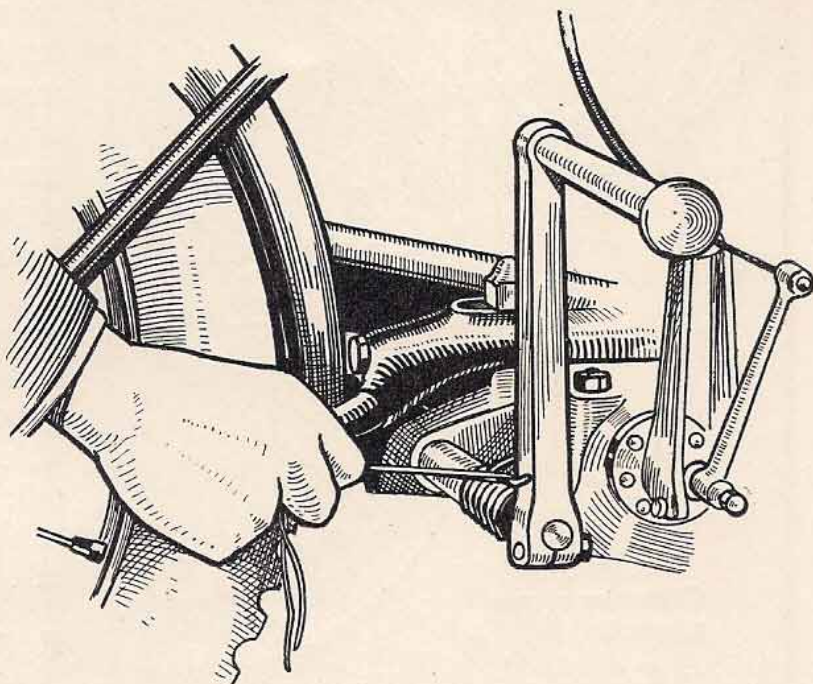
A.—METHOD OF REPLACING FOOT-STARTER SPRING.
